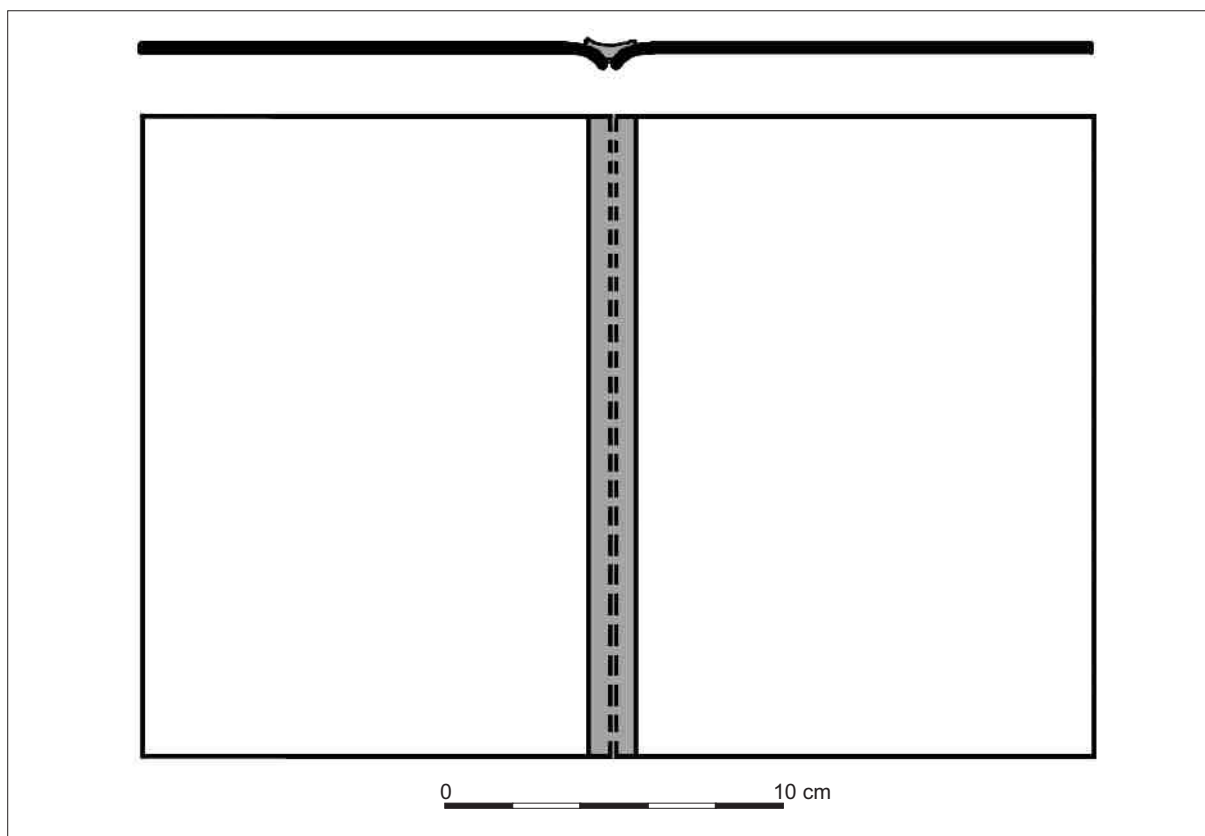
Technical drawing showing the fixing of the plates. *Drawing by D. Rabovyanov.
